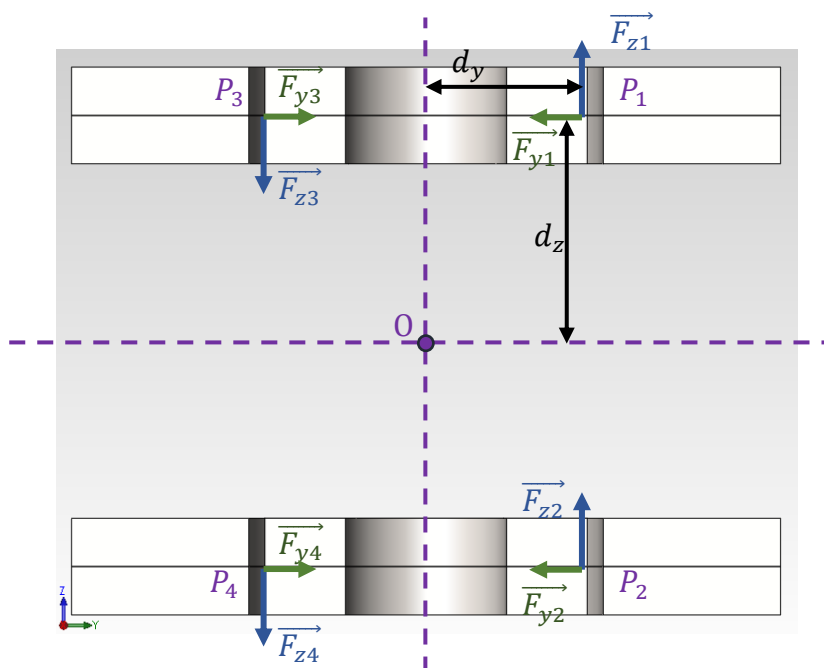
Force components over the passive bearing ring for a small counterclockwise rotation
